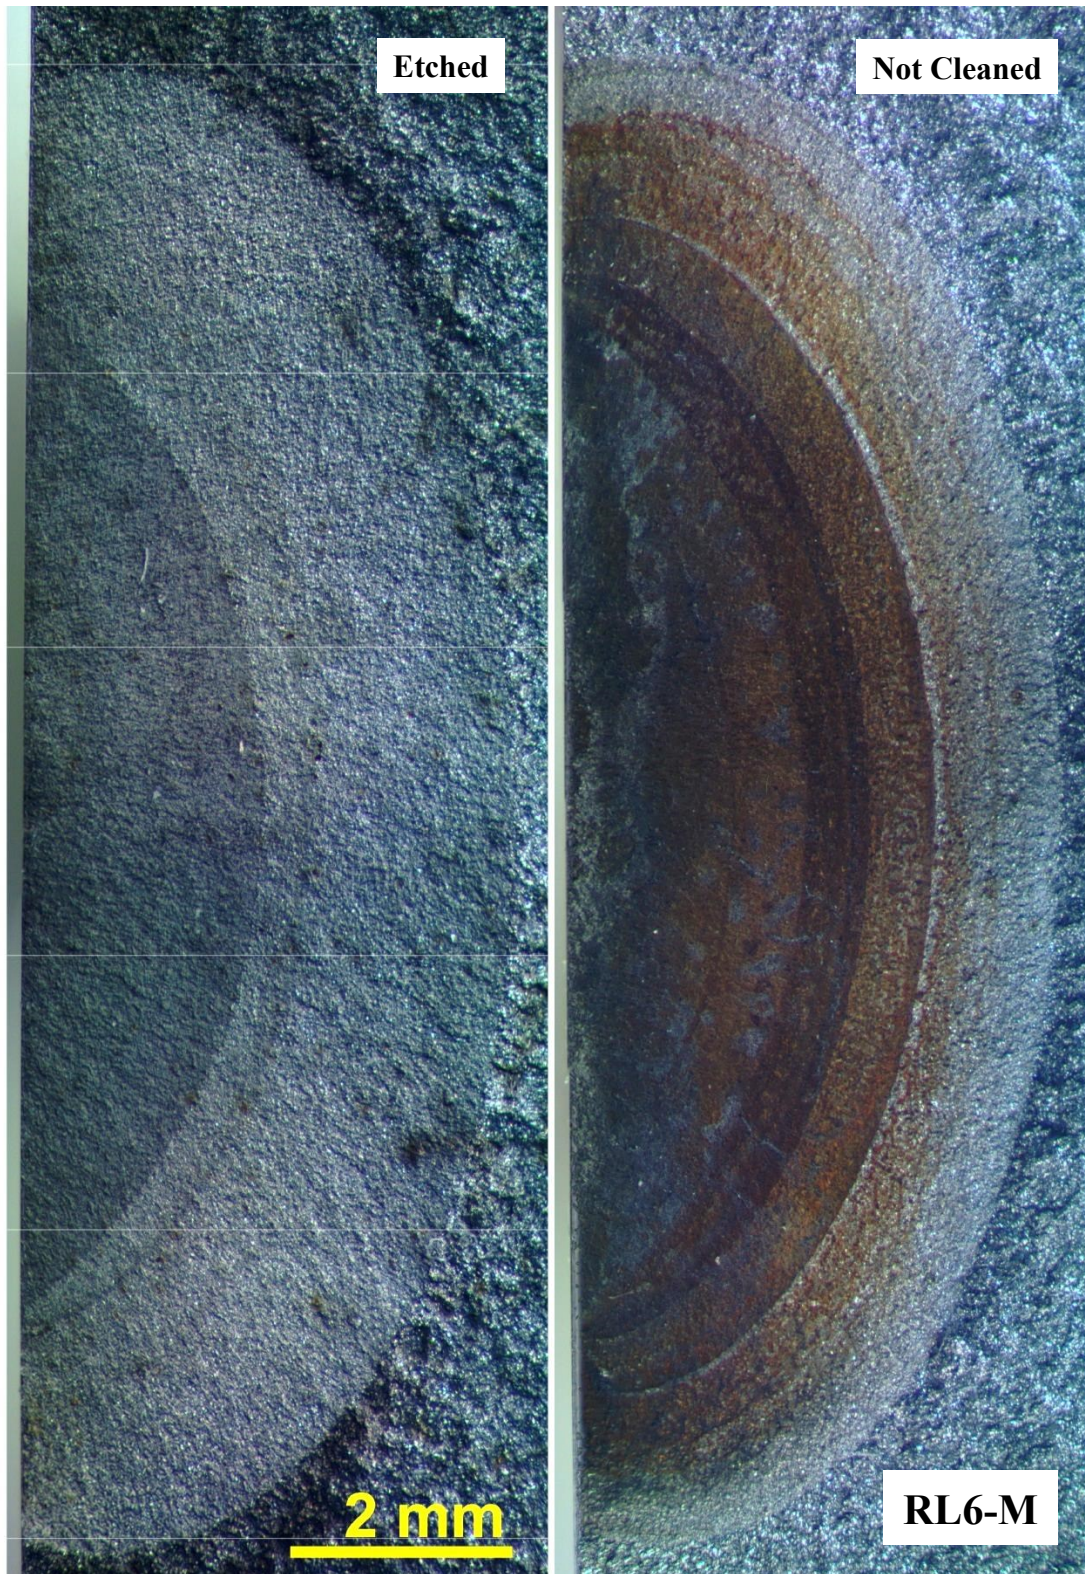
Fractograph for RL6-M. Imaged with a stereomicroscope. On the left is an etched fracture surface. On the right is a fracture surface that has not undergone cleaning.
